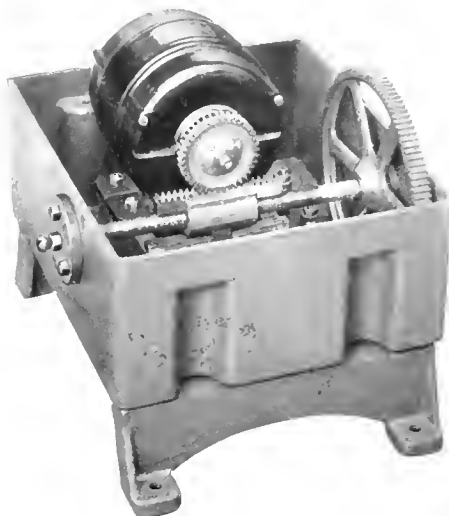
Rising Stem Valve Transmitter, Cover Removed
